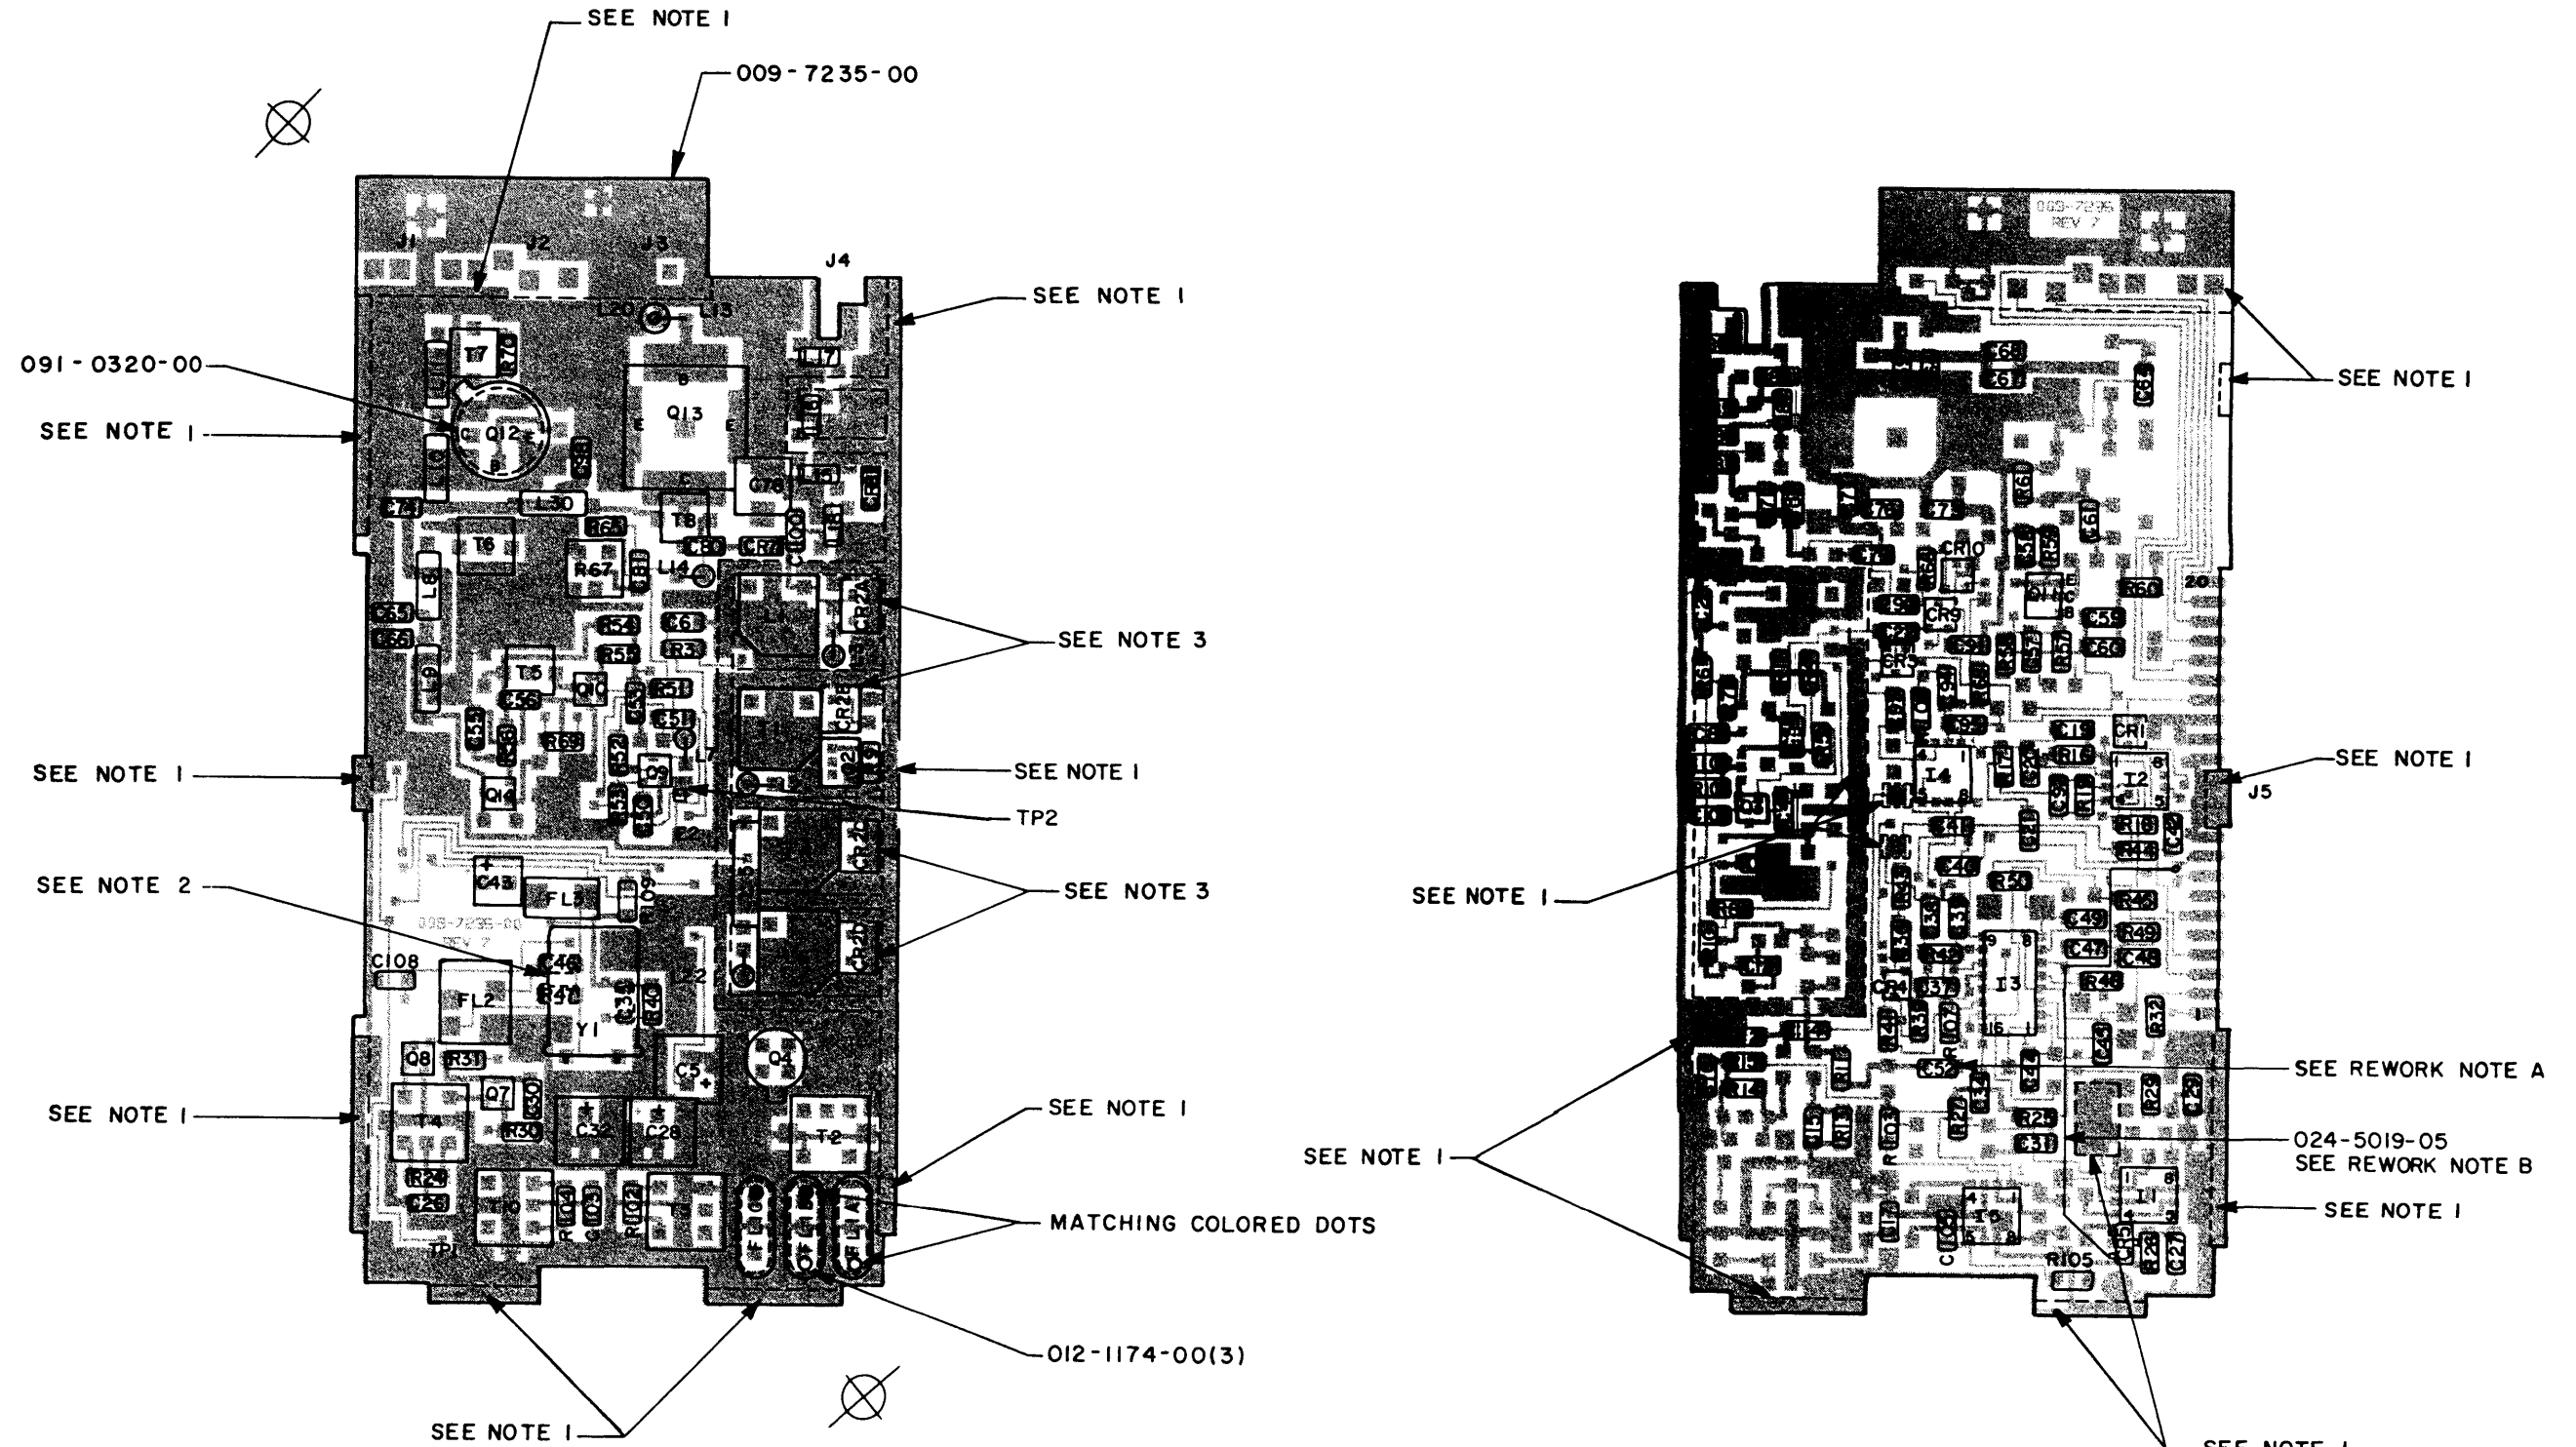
RECEIVER/TRANSMITTER BOARD ASSEMBLY
